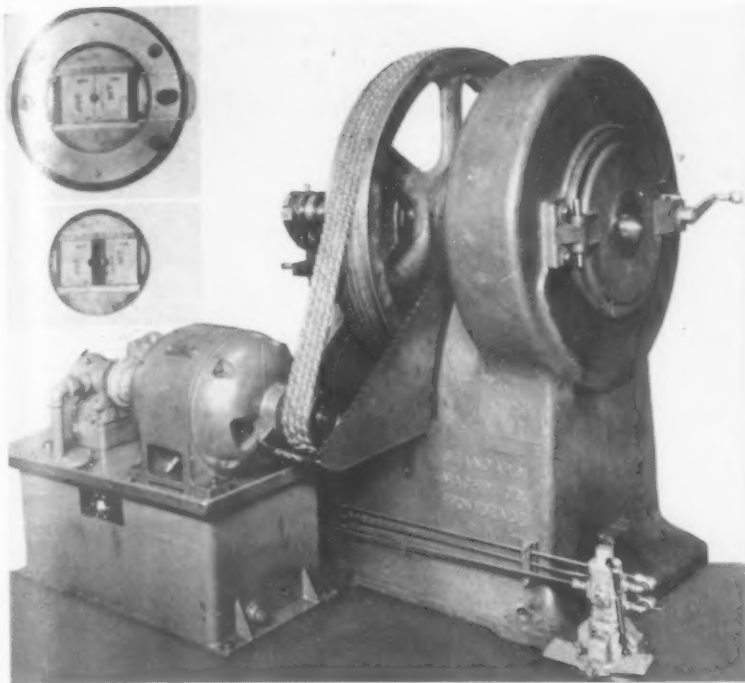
shows front and rear views, respectively, of the swaging machine (by Standard Machinery Company, Providence, R. I.) developed for swaging bulbous shapes such as shown in Figs. 7, 8 and 9. Wedges, operated by the mechanism shown at rear of machine, and shown in the insets, close and open the dies to permit entry and withdrawal of the larger diameters.
